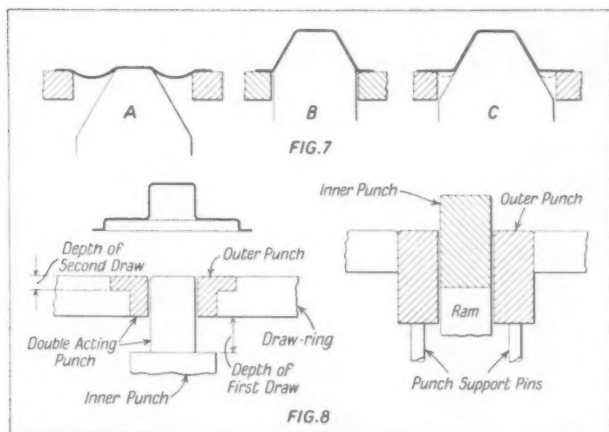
To Prevent Excessive Overhang of the Blank, as at A, the Part Should be Preformed as Indicated at B, and then Finished at a Second Drawing Operation C. Fig. 8. Two Examples of Double-acting Punches Used to Prevent Rupture of the Metal or Wrinkling Due to Overhang of the Blank
